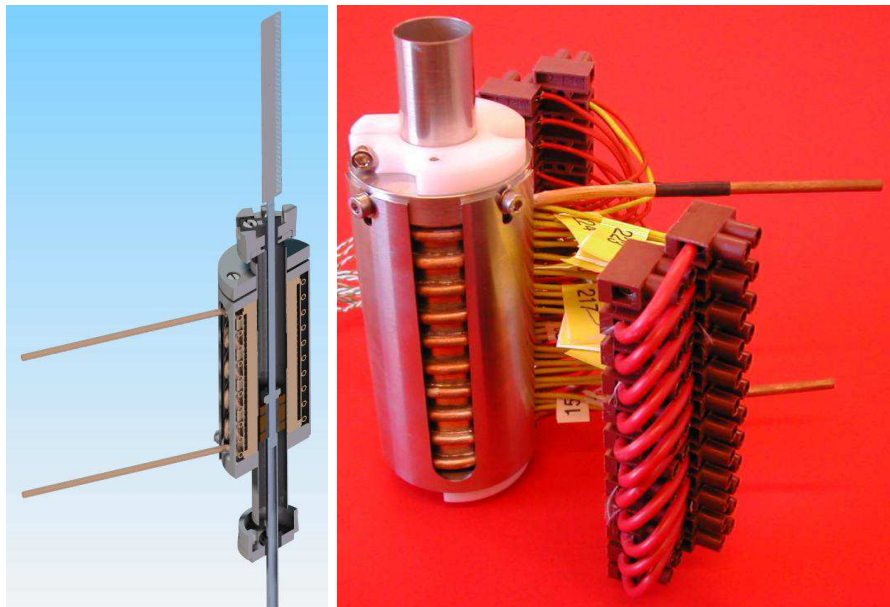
(left) Stator assembled with shaft and disc spring plate on top, wiring not shown; (right) Tested stator unit ready for assembly (shown with temporary plastic clamps).
